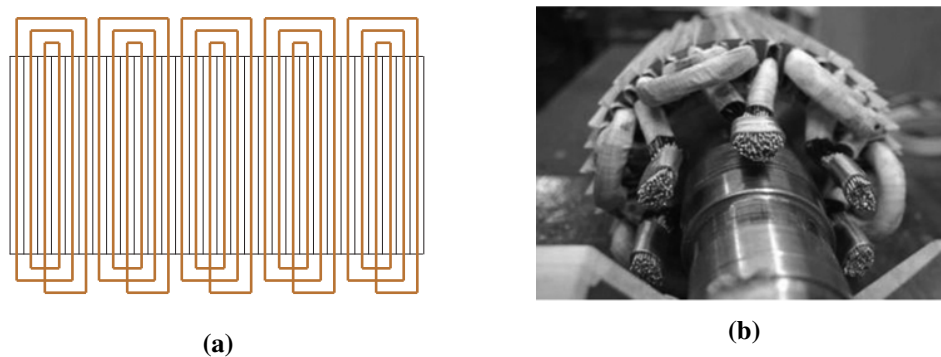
SW rotor (a) Winding arrangement (b) Prototype [9].
